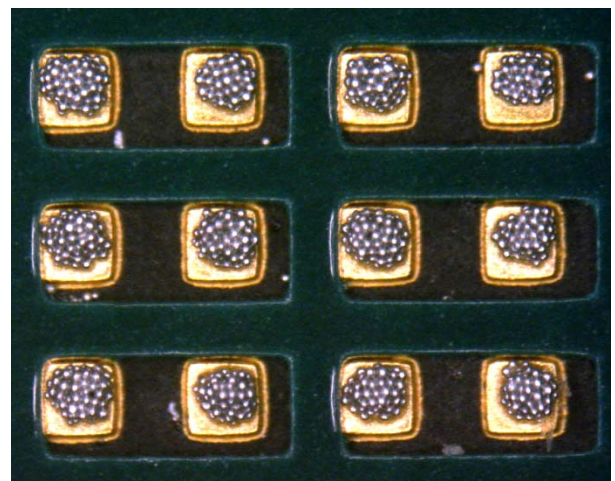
Solder deposition on 1005 pad with square aperture. Paste type 4 and 3mil stencil.
